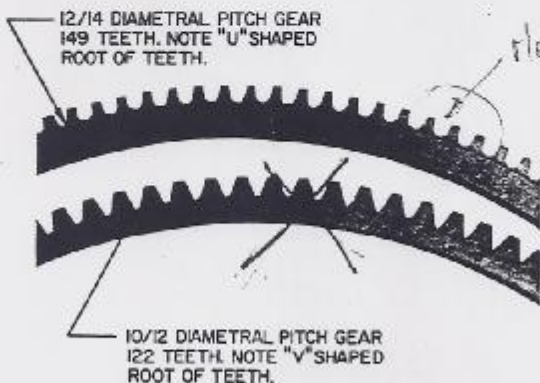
Segment of Starter Ring Gears Showing Difference in Gear Teeth
